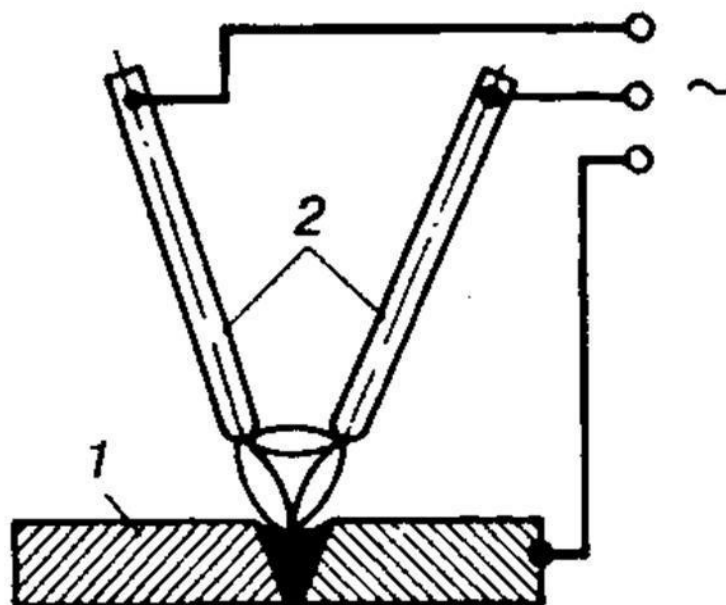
Scheme of arc welding with fusible metal electrodes with using a three-phase arc
